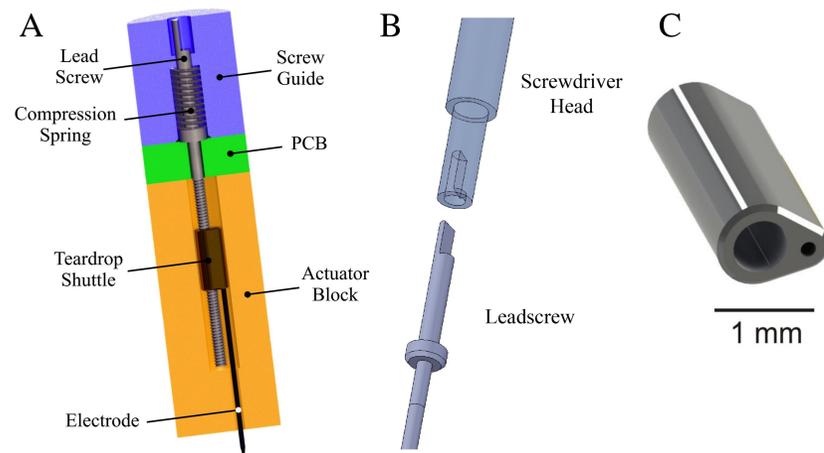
A) Cross-sectional view of the actuator mechanism, illustrating the relationships among the components. B) Design drawing of the leadscrew head and mating screwdriver. C) Teardrop shuttle design. The lead screws can be manufactured to enable up to 42 mm of electrode travel.
